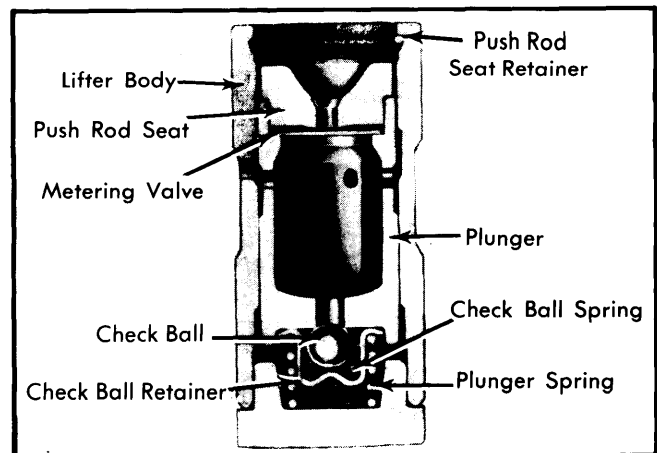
Cutaway of Hydraulic Valve Lifter Assembly
